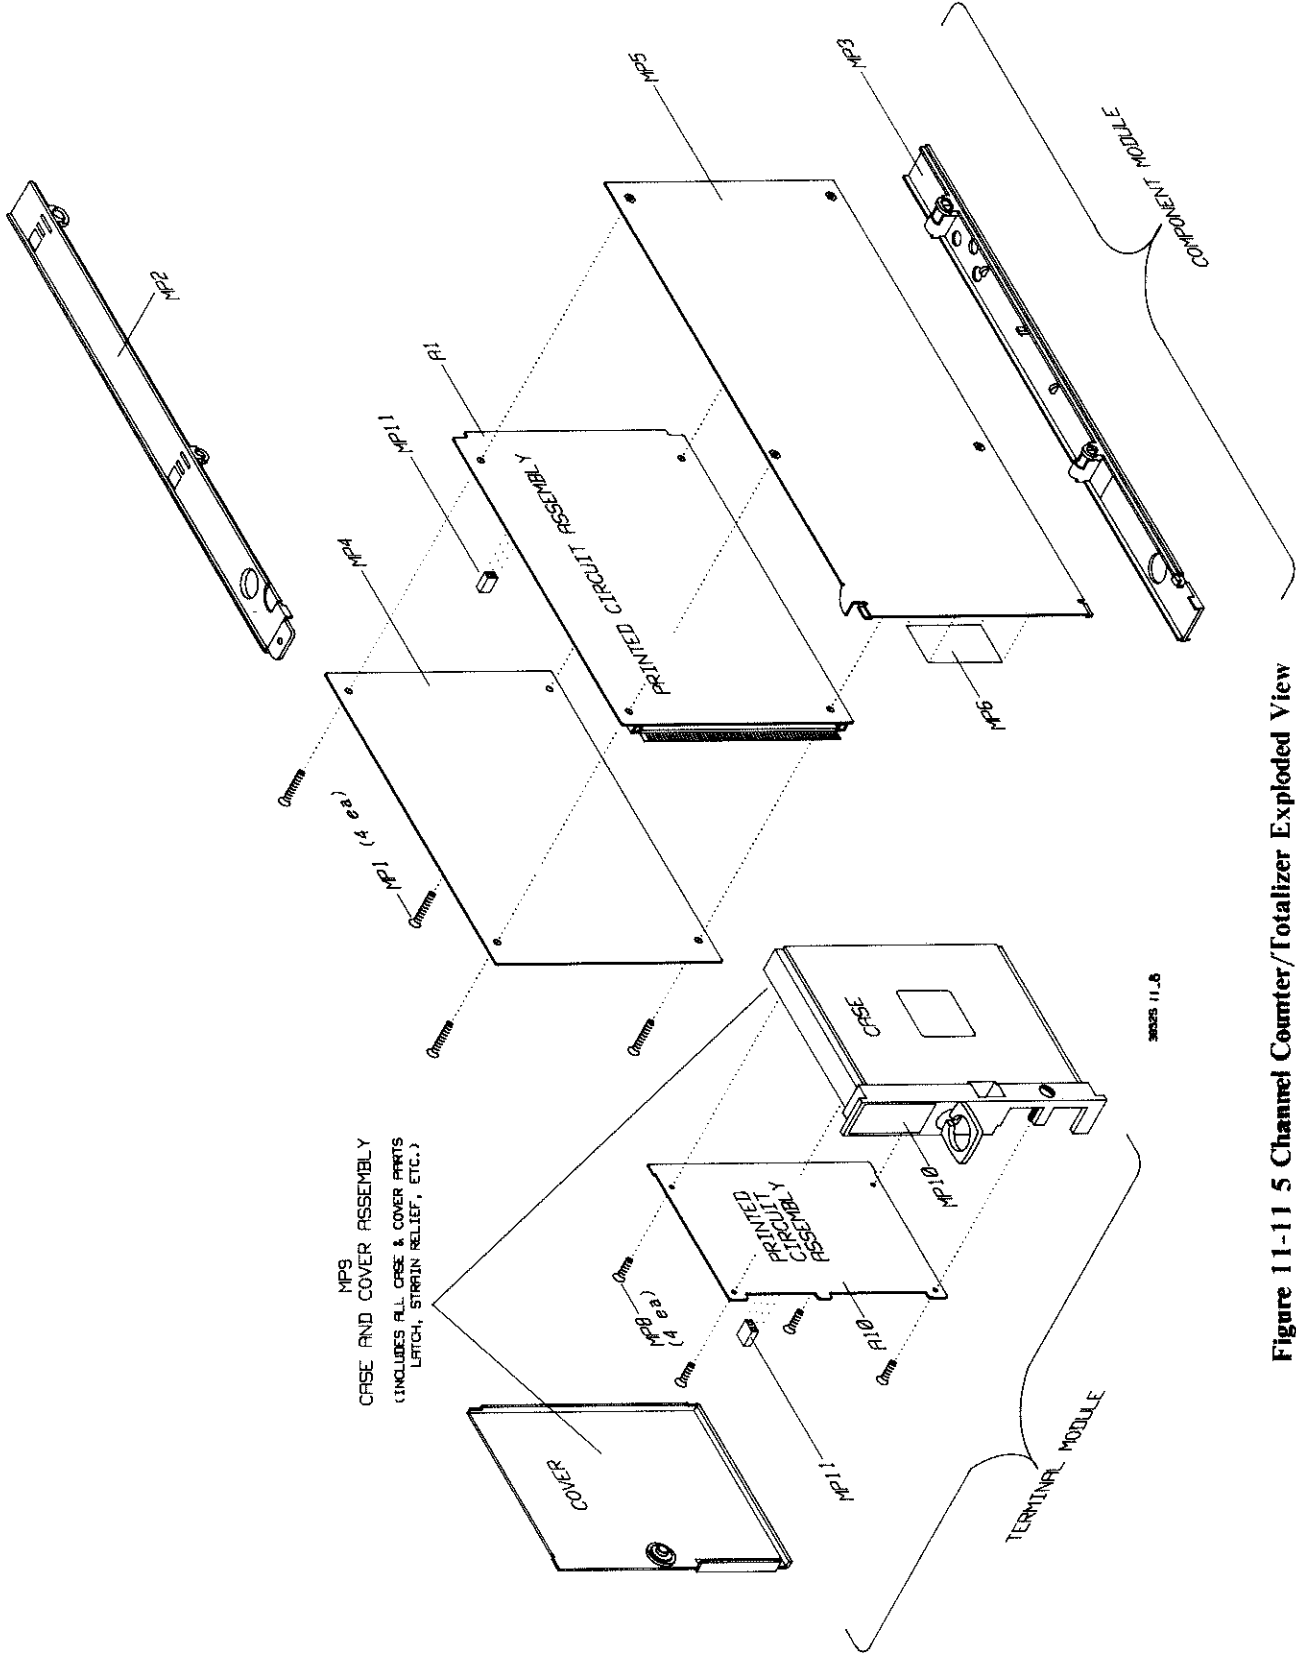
5 Channel Counter/Totalizer Exploded View
